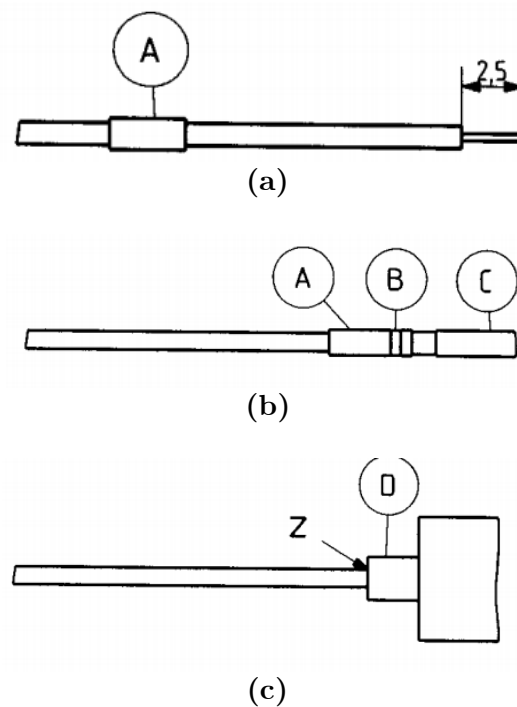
Steps in soldering the SMA connector to the coaxial cable.
